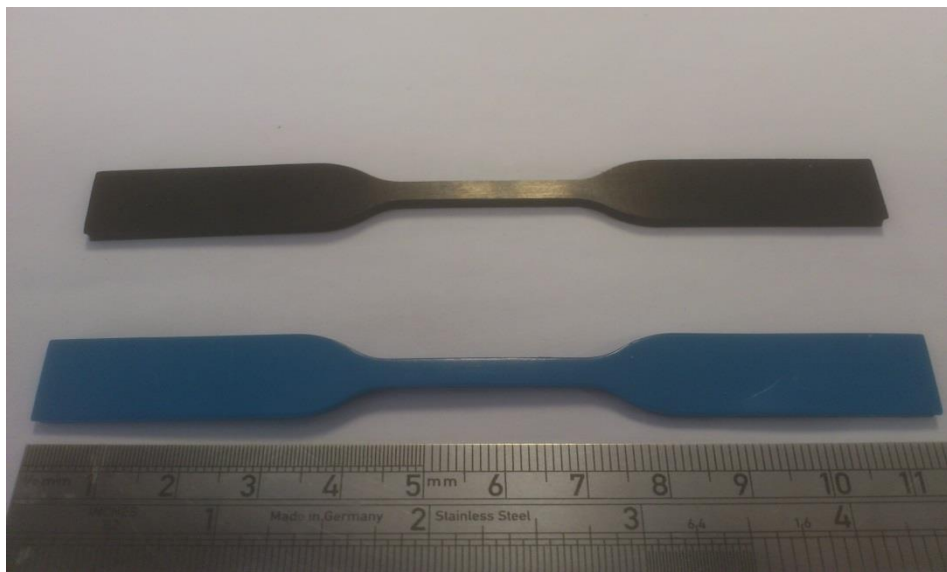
Geometry of test specimens used in the uni-axial tests.
